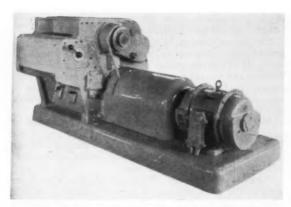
Machine for cutting wood shavings with cylindrically mounted knives, made by H. Rottmann. The wood blocks are dropped into a hopper from where they are pressed against the rotating knives with four pusher bars mounted on a crankshaft. Maximum size of wood blocks, $22 \times 8 \times 3$ in. Power: starting, 60 kw; operating, 37 kw.
